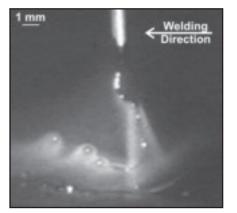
The flight path of molten filler metal droplets in rotational transfer mode at 11 kW using argon shielding gas.
